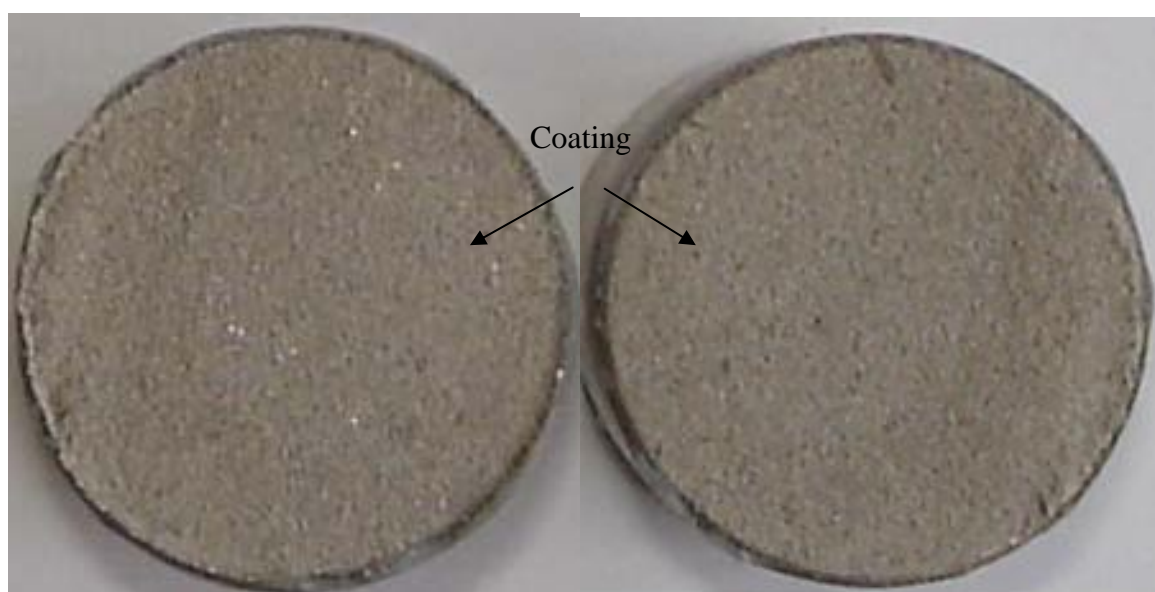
Top view of Ni-20 wt. % Ni coated BN (75 μm) coating surface after fracture showing cohesive failure within the coating
